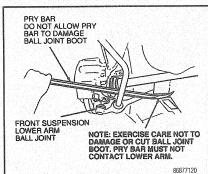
When separating the ball joint from the steering knuckle, be careful not to damage to ball joint boot
